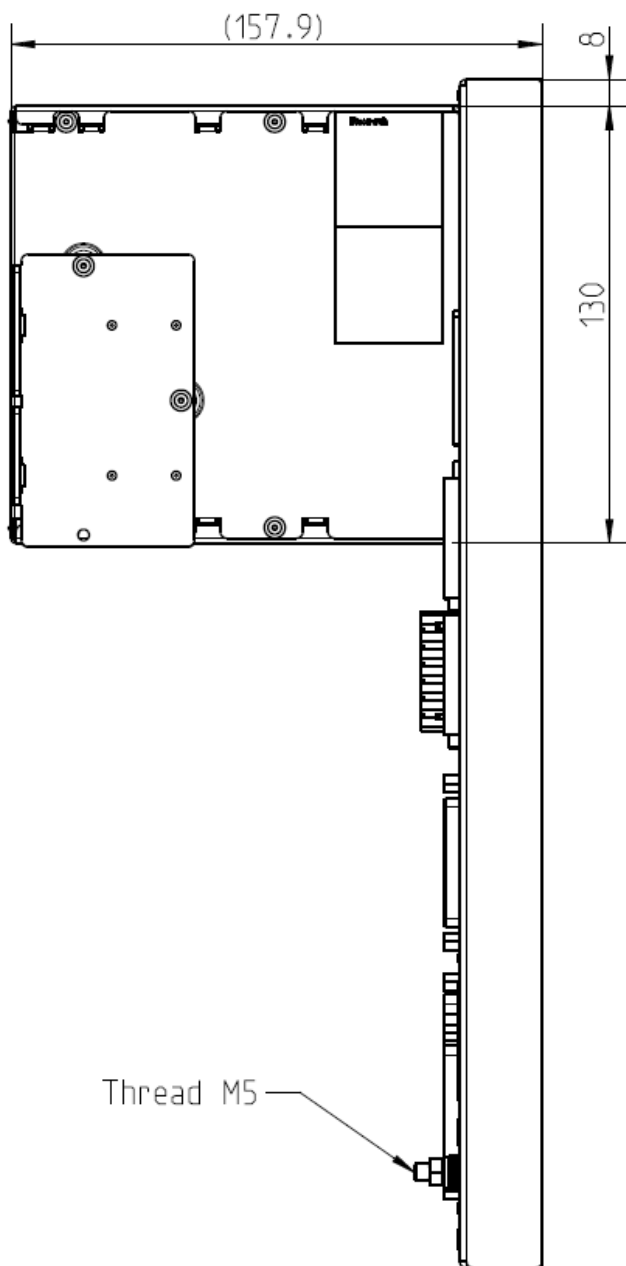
Dimensions (side view) of the NYS04.2-ST-04-ULNN-NY4043
